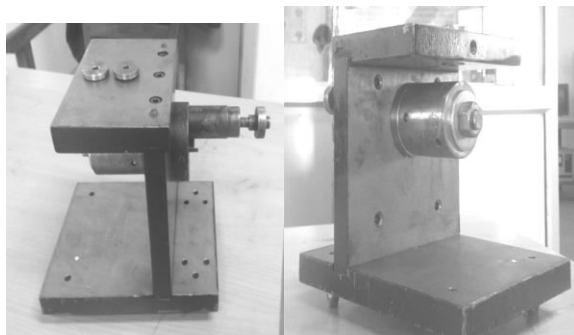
Existing Indexing Drill Jig with mandrel.
